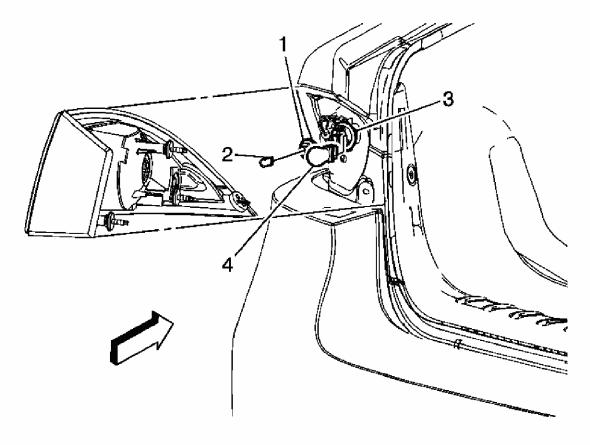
Removing/Installing Tail Lamp Bulb Courtesy of GENERAL MOTORS CORP.
